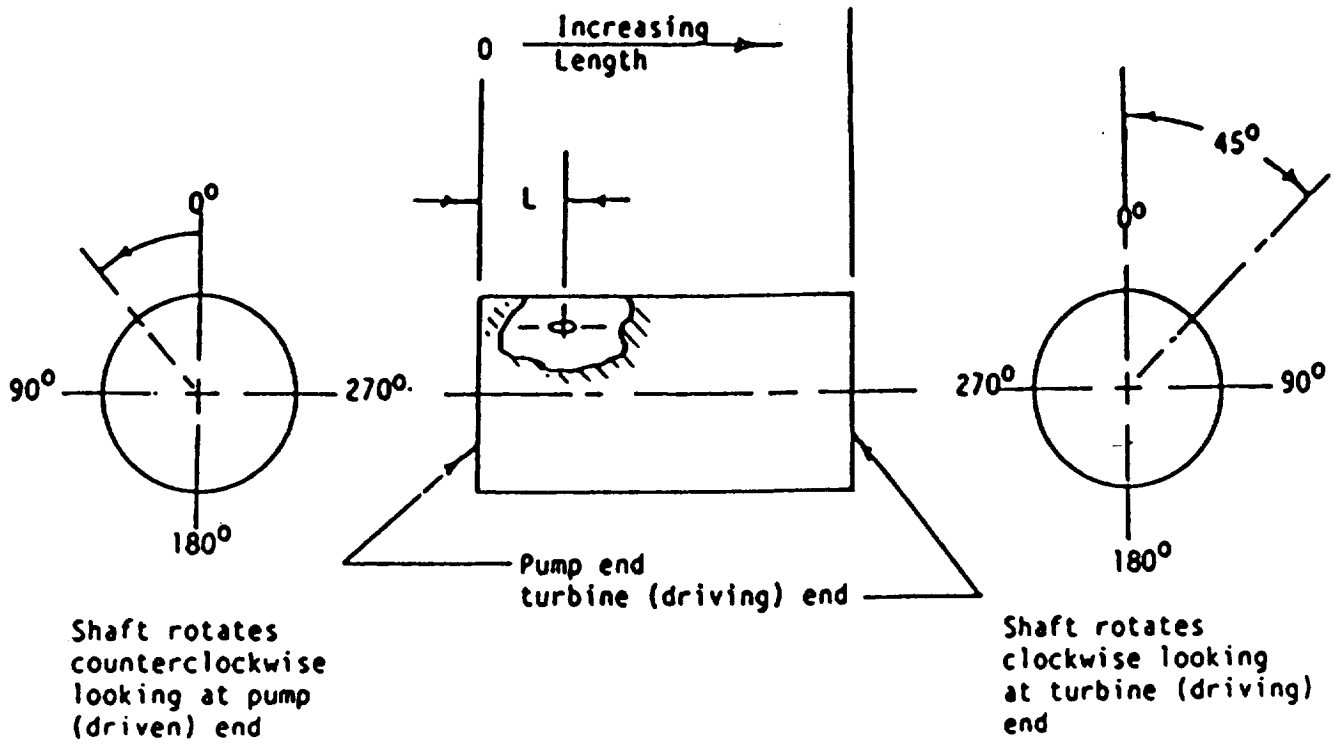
OTV Oxygen Turbopump Assembly
